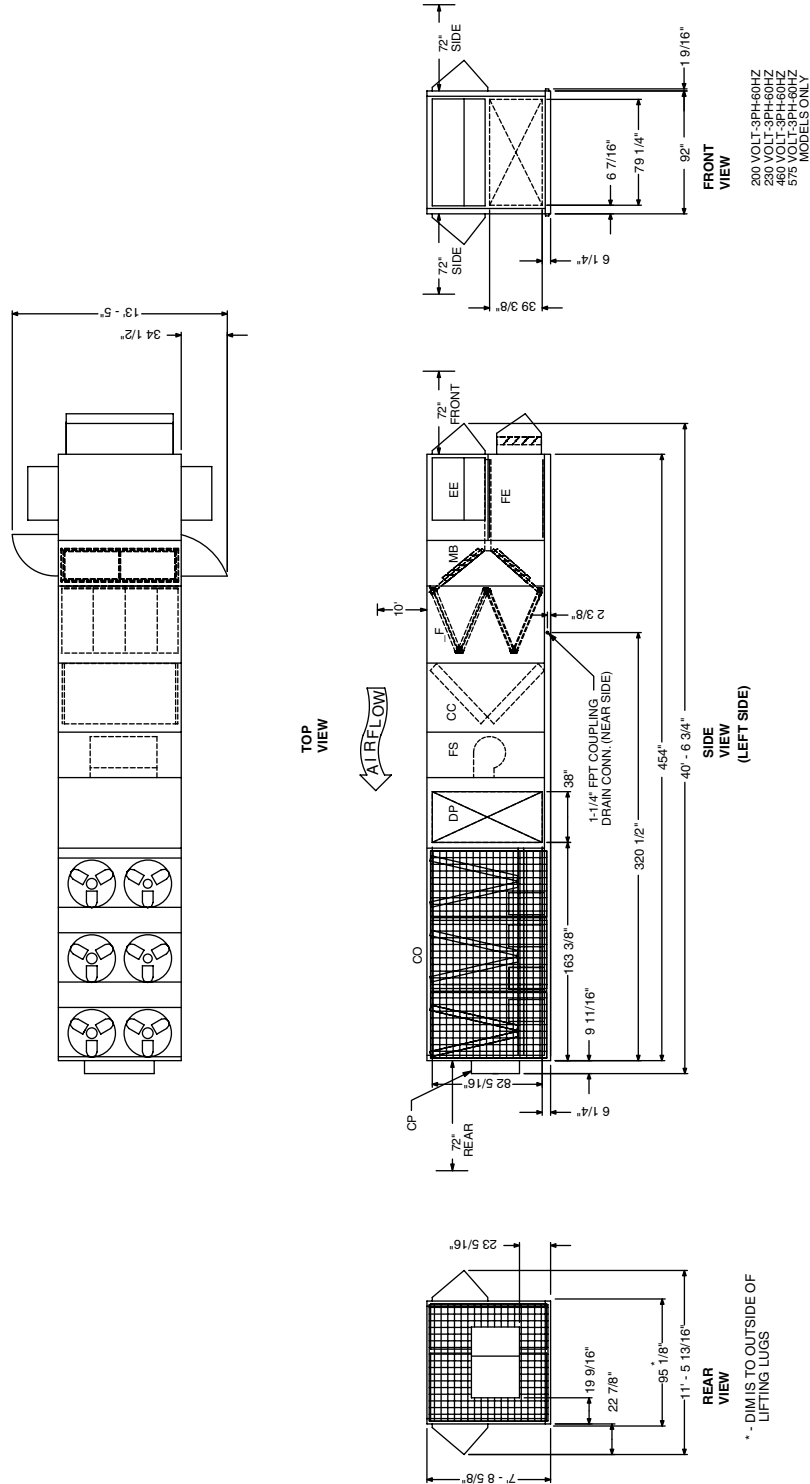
GENERAL ARRANGEMENT DRAWING
